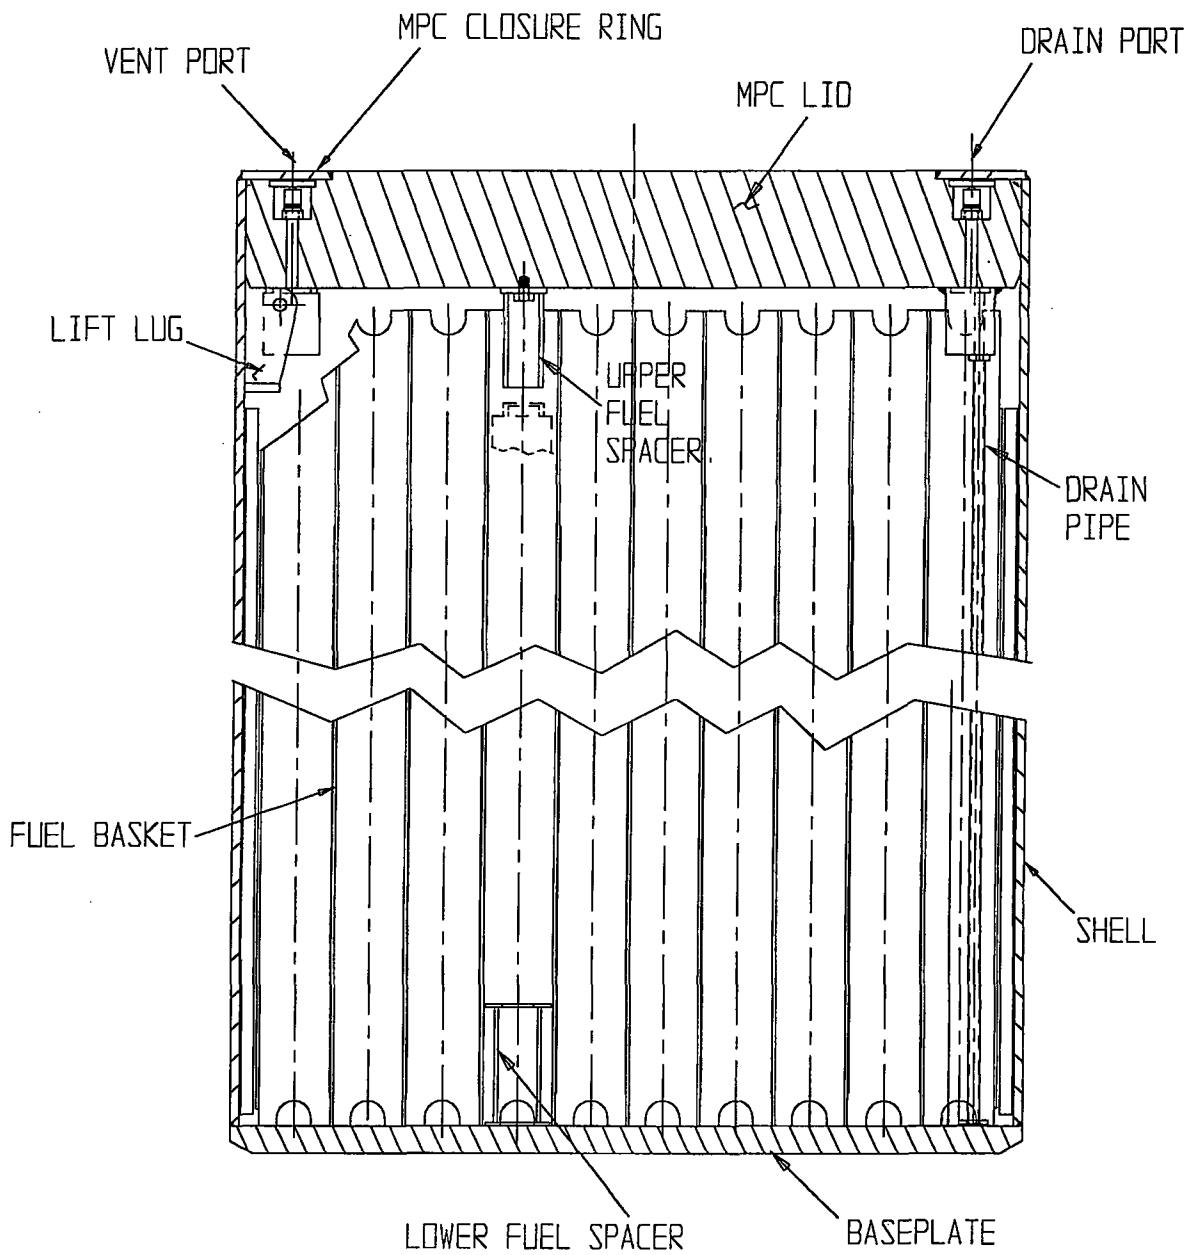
; CROSS SECTION ELEVATION VIEW OF MPC
